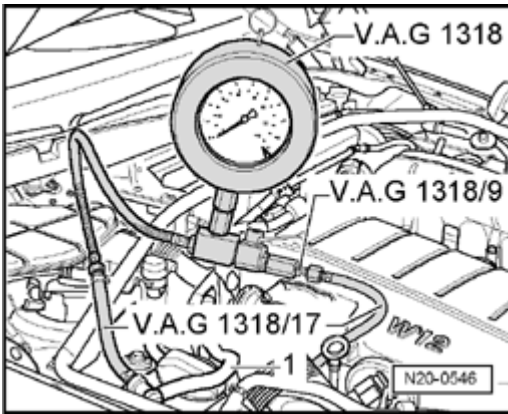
Pressure Gauge V.A.G 1318 Connected To Supply Line And Hose To Fuel Rail Using Adapter V.A.G 1318/9 And Adapter V.A.G 1318/17
